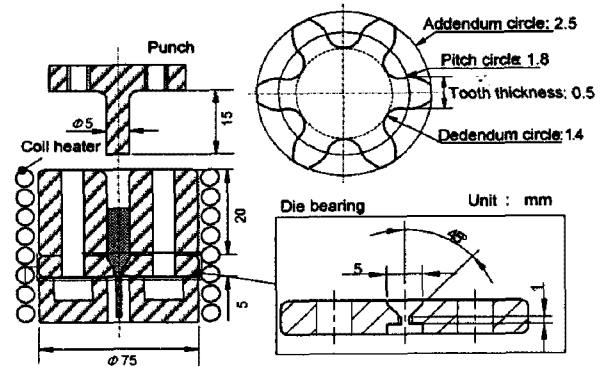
Shapes and dimensions of the spur gear and extrusion die
